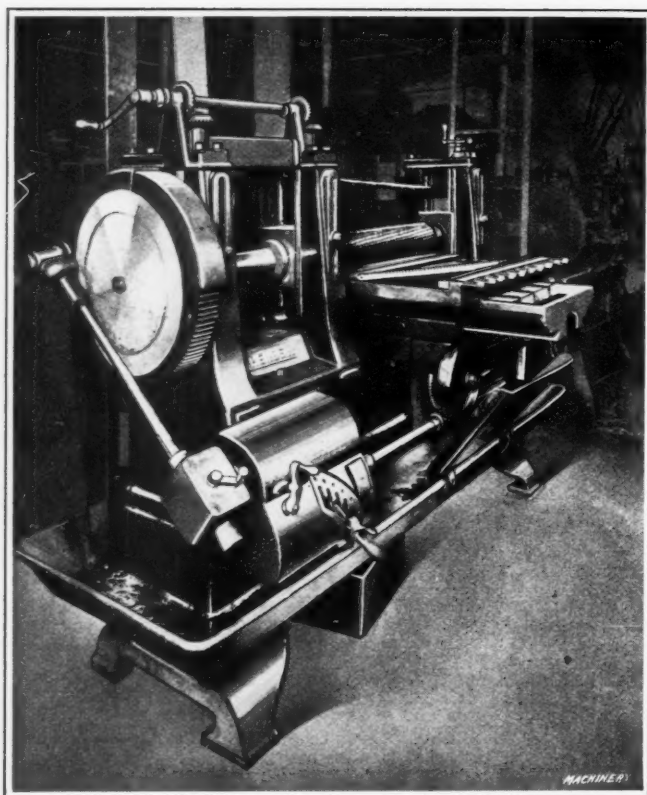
Hendey Milling Machine equipped for milling Teeth in Hacksaw Blades
